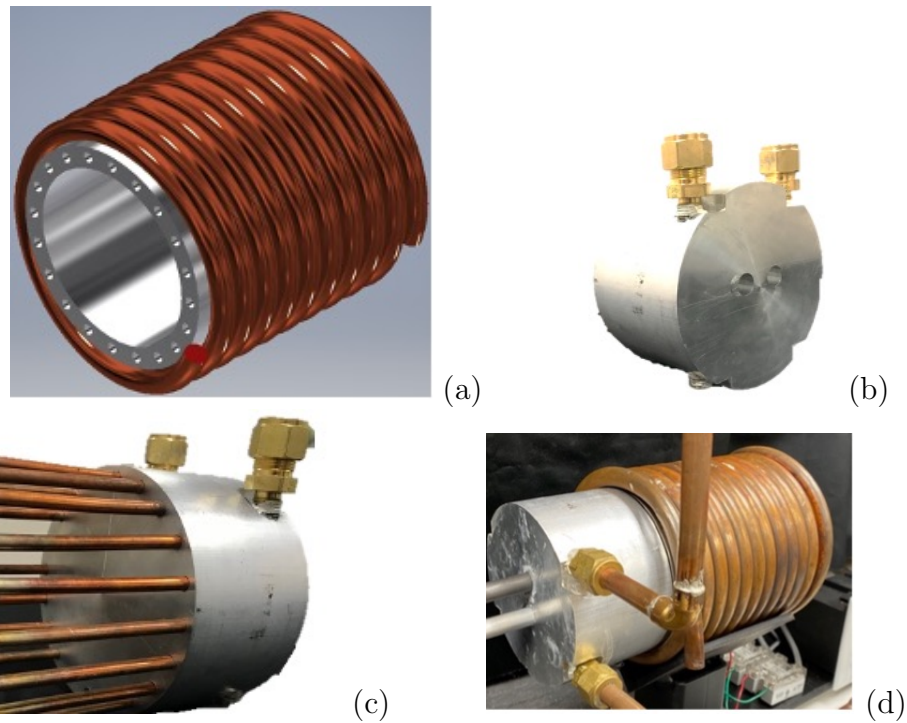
Cradle - (a) structure with featuring liquid jacket; (b) front view - endcap; (c) back view – end cap with embedded capillary heat pipes; and (d) complete prototype .
